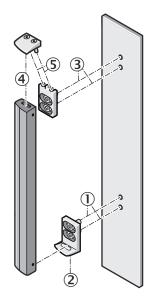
Mounting the miniTwin2 with L-Fix bracket
